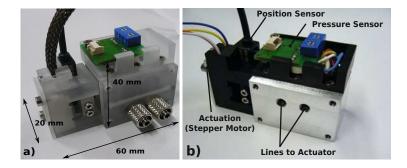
a) Valve developed using rapid prototyping technique b) Final valve in aluminum with all integrated components.
